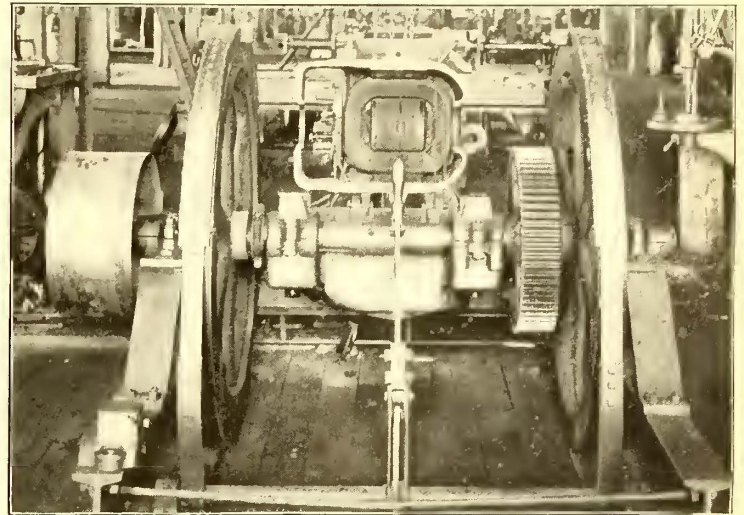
FRICTION BRAKE FOR TESTING ARMATURES
